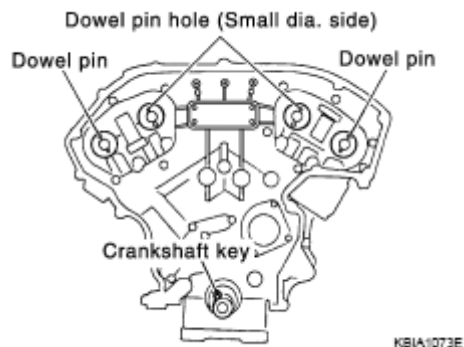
Identifying Camshaft Dowel Pin Hole Position
